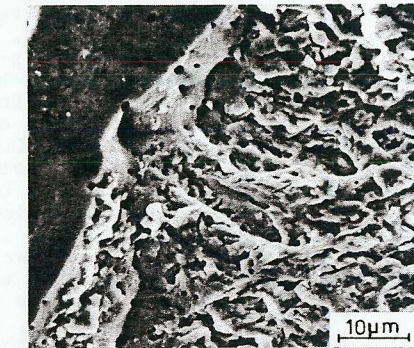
Weld crack: grain boundary as crack origin
